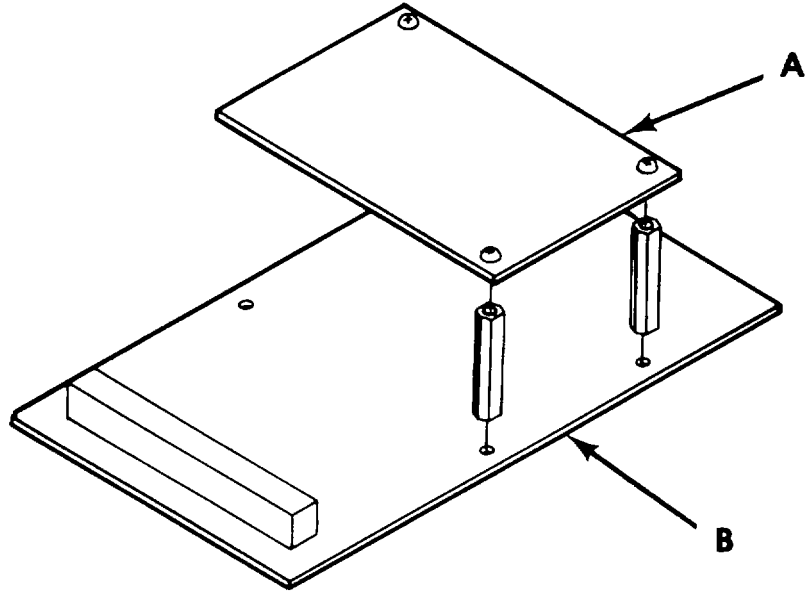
Circuit Board Assembly (Sheet 1 of 2)
